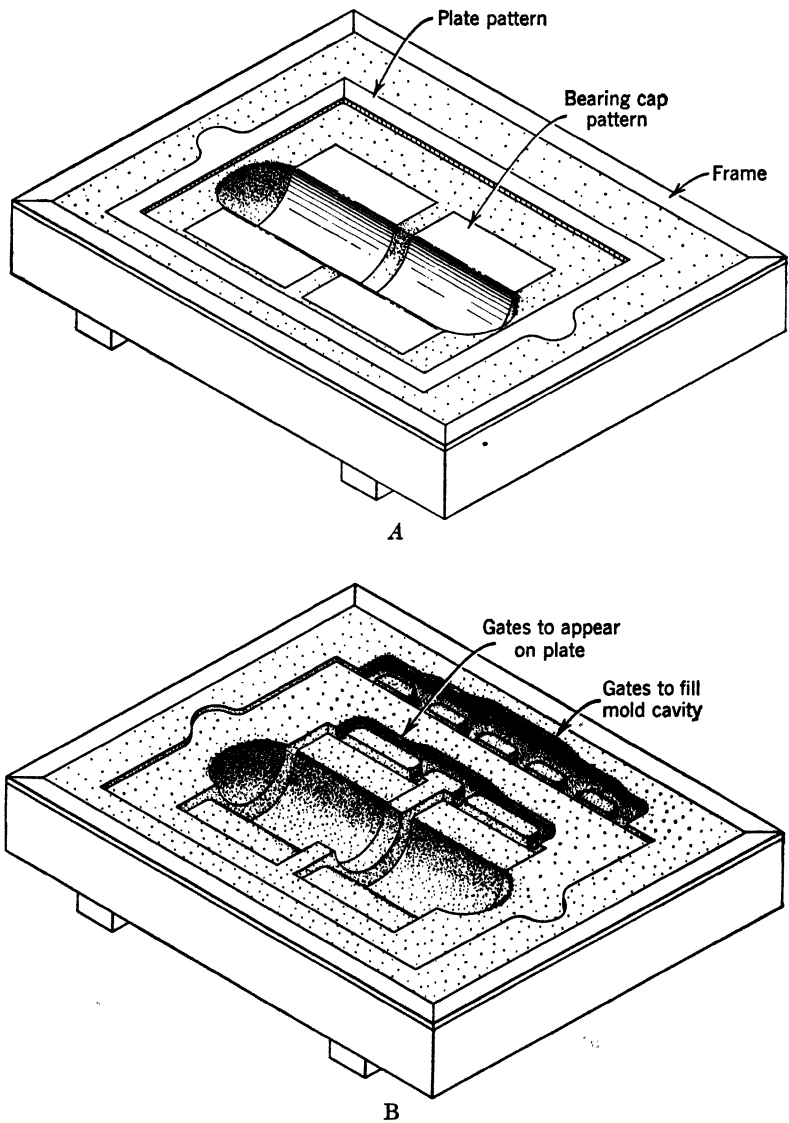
A. Drag for cast plate before patterns are removed. B. Completed drag for cast plate.
